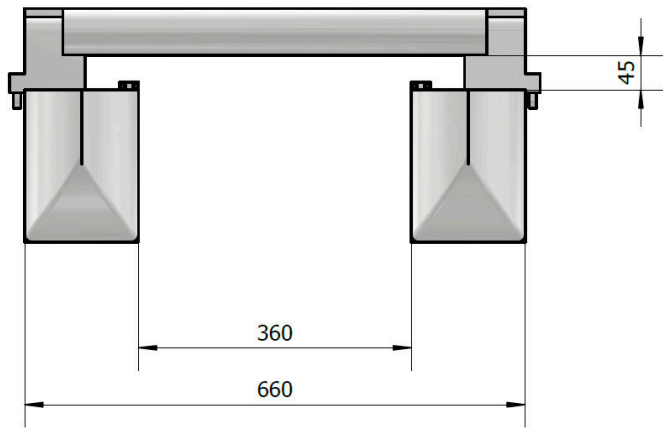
Section view of the catamaran floating structure; dimensions in mm
